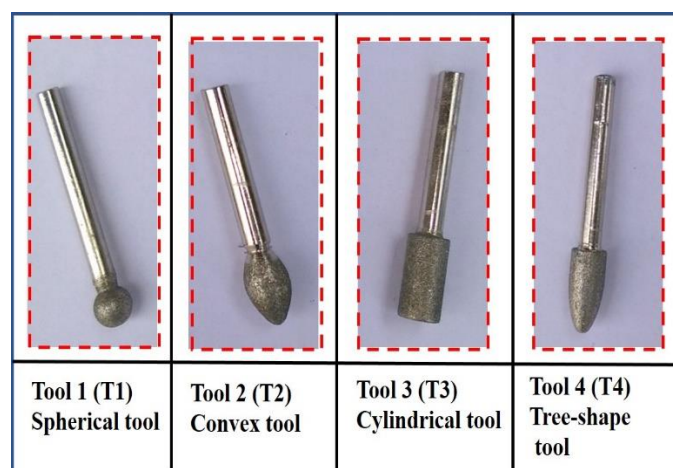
Different shaped surgical grinding burrs: (a) spherical tool, (b) convex tool, (c) cylindrical tool, (d) tree-shaped tool.
